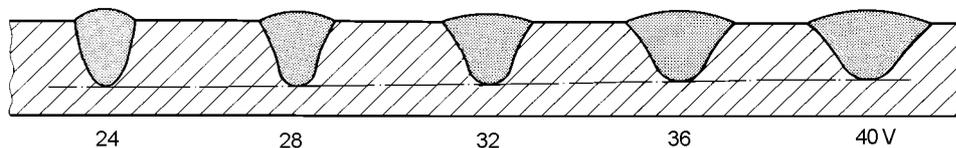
How a change in arc voltage affects the shape of weld. Welding current is constant.
